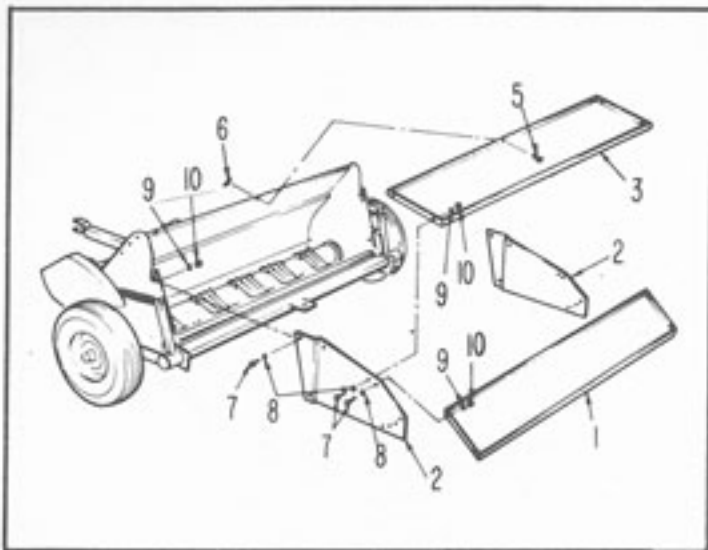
8118 - REAR DEFLECTOR ASSEMBLY
